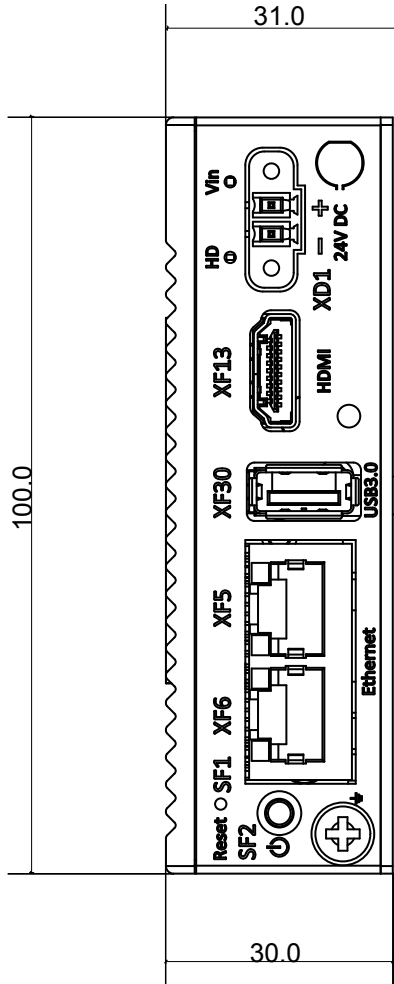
Mounting dimensions for device variant NA, top-hat rail mounting
